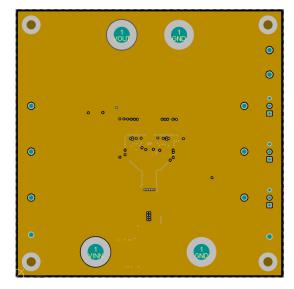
PCB Ground Layer (Directly Below Top Layer)
